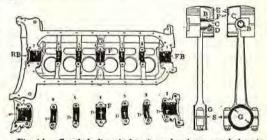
A. Crankshaft main bearings showing upper halves in crankcase which is turned upside down (crankshaft removed). Lower bearing halves are shown in the bearing caps below.
